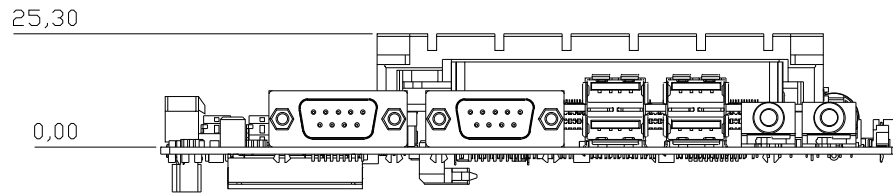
MIOe-DB2000 Mechanical Drawing (Front I/O)
